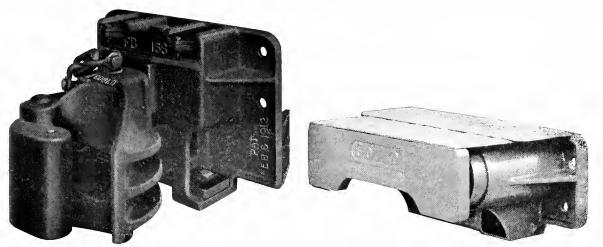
Gould Friction Striking Plate Buffer for Freight Cars. See also Fig. 527. Gould Coupler Company.
